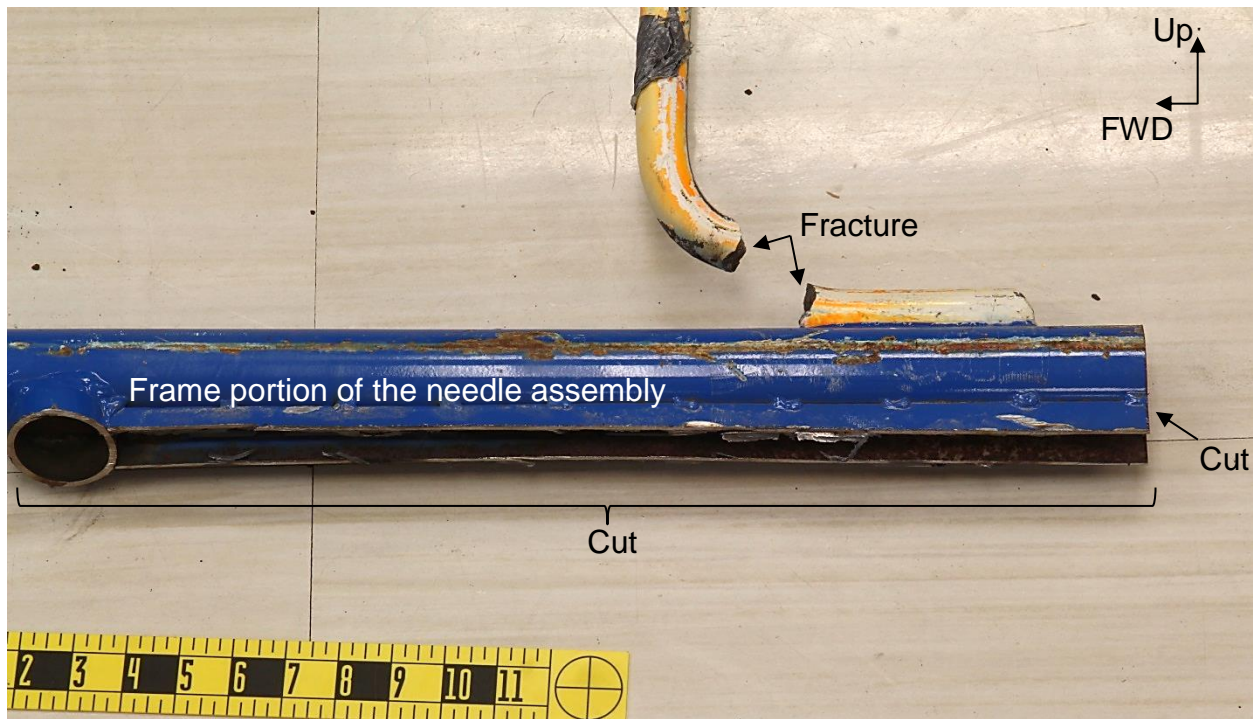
Close-up photograph showing one end of the fractured hook at the center portion of the needle assembly.
